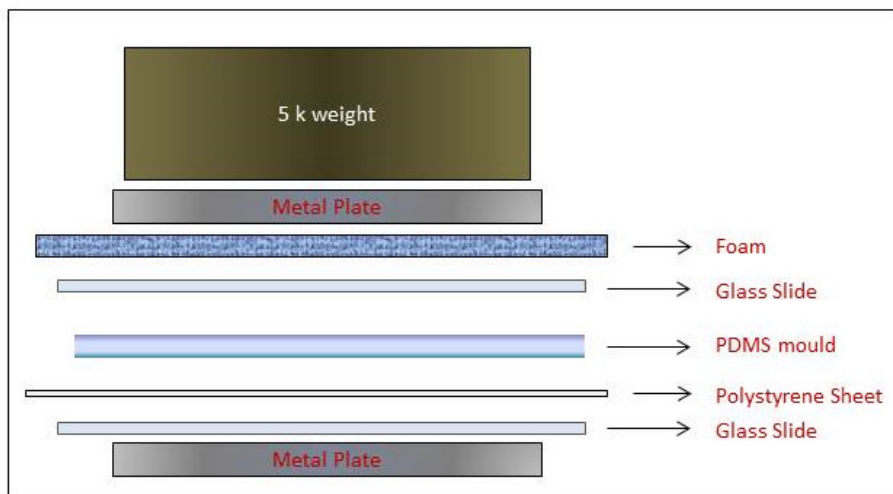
Stacking assembly for hot embossing using a hot plate. The lower metal plate is placed directly onto the hotplate (not shown). Glass slides bracket the polystyrene to be patterned and the PDMS mould in contact. A foam layer, made of dense sponge material ensures equivalent distribution of the pressure generated by the metal plate and 5 kg weight stacked above it.
